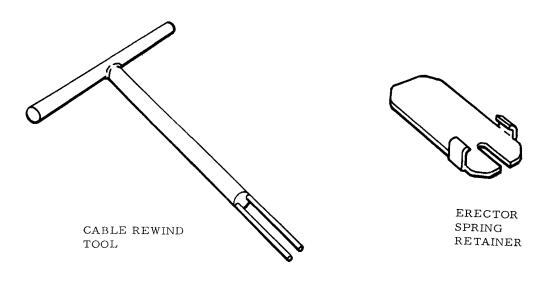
Cable Rewind Tool and Erector Spring Retainer
